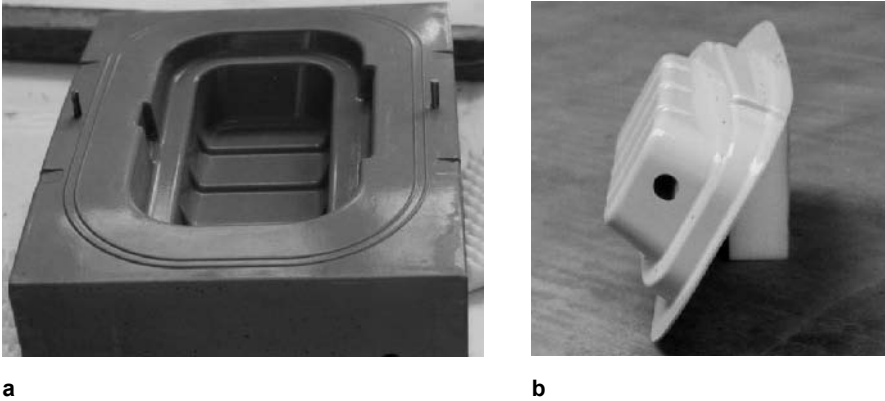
Superplastic forming of titanium sheet components: (a) One piece die (b) Resulting sheet metal part (courtesy W. Beck, FormTech)
